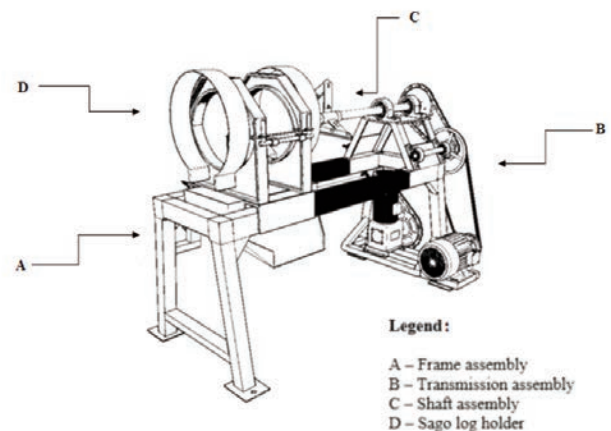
Design of sago pith extractor indicating the four major components, power transmission assembly, log holder assembly and the main shaft assembly.
